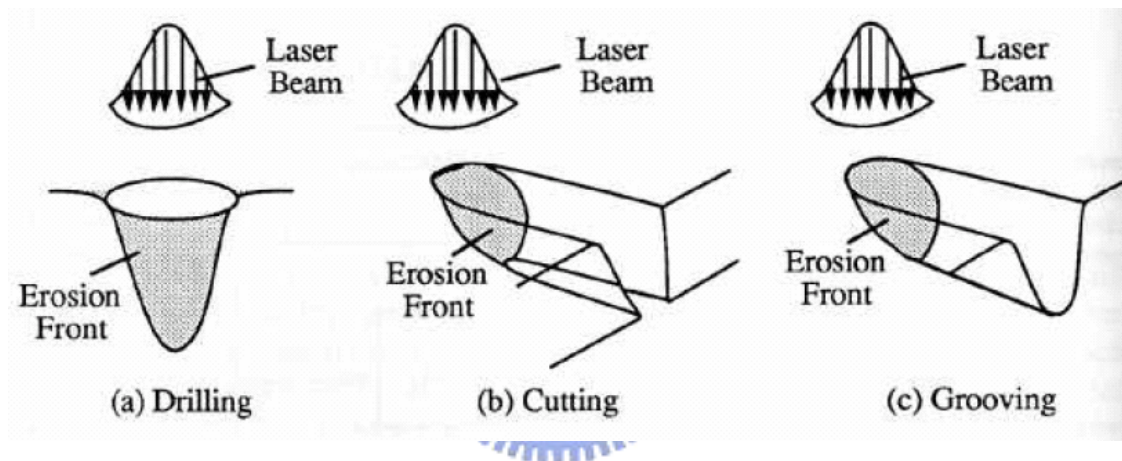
Laser cutting mechanism (from MIT Media Lab)
